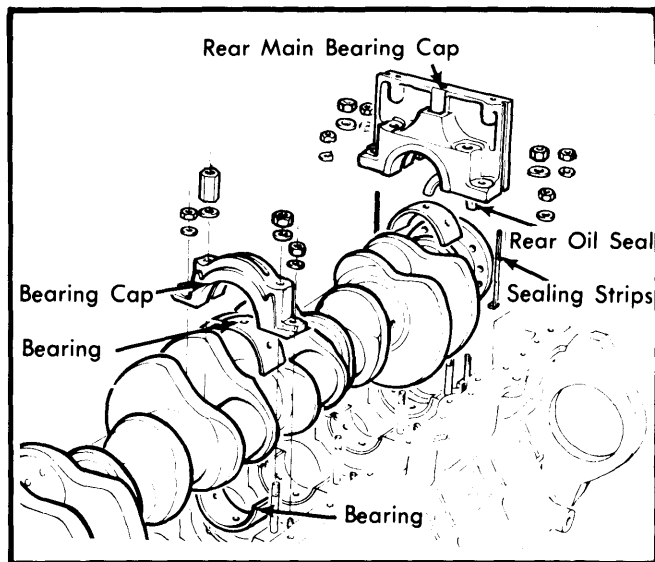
Exploded View of Main Bearing & Rear Oil Seal Assemblies
